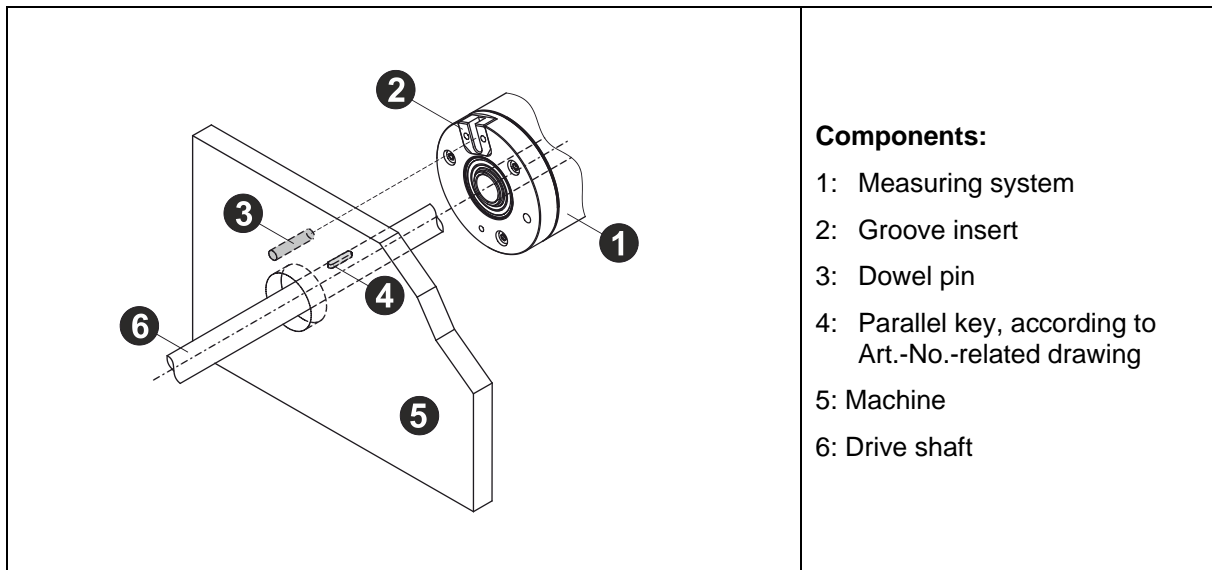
Mounting with dowel pin / groove insert, principle illustration
